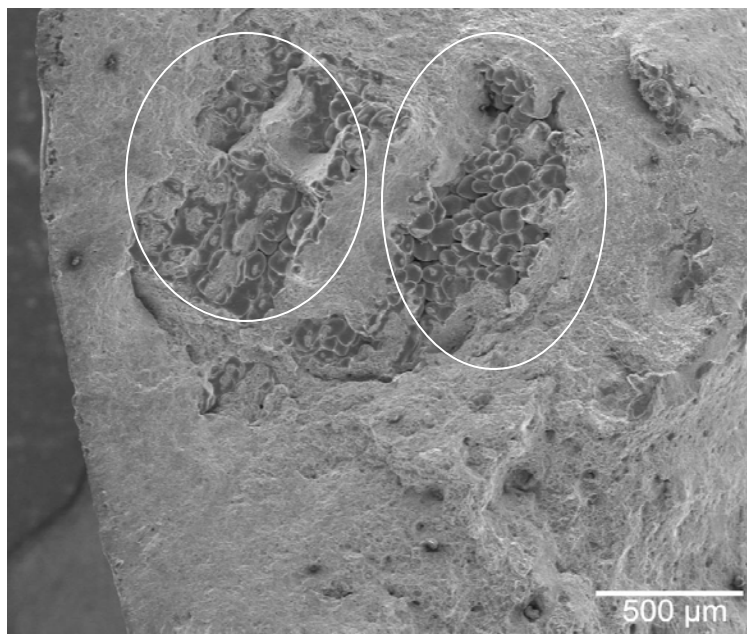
Dendrite Development on a Sound Monotonic Test Specimen Fracture Surface (Specimen A3)
